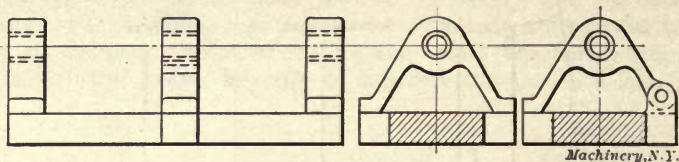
Boring Jig with Removable Bearing in the Center, Adapting it to Different Sizes of Work of Similar Character
